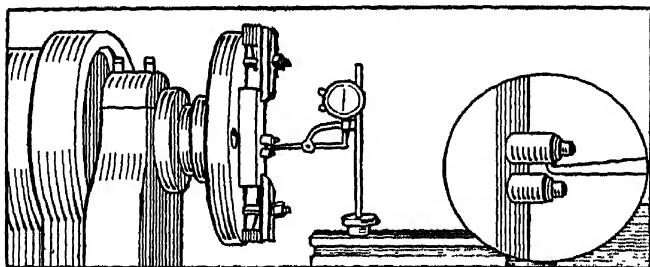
LOCATING JIG IN FACE PLATE OF LATHE
